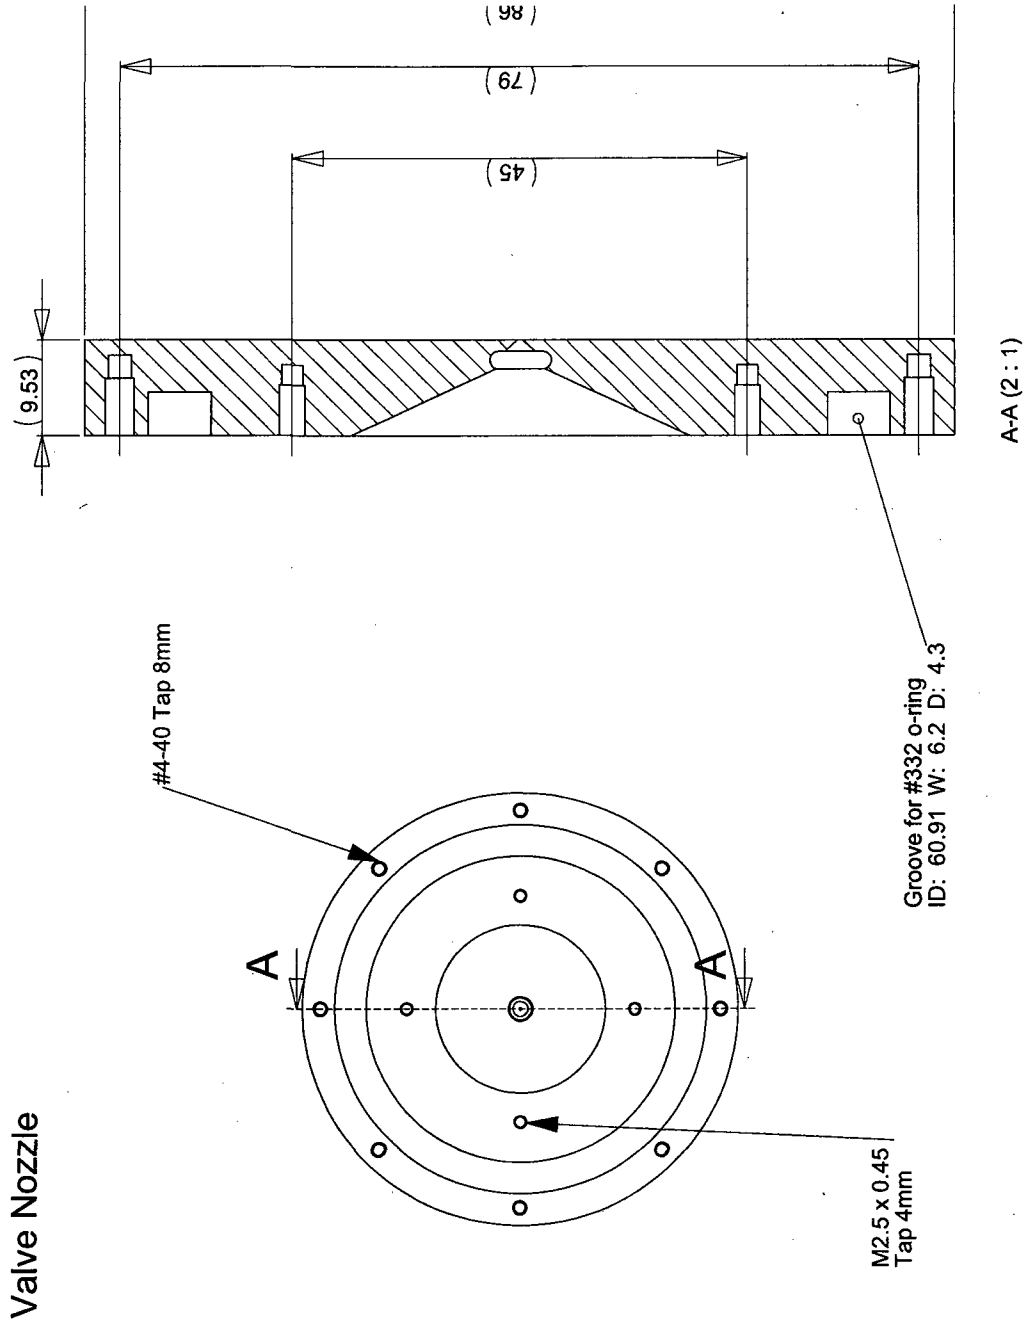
Piezo valve nozzle (bolts to front of valve body). Inner bolt ring supports the piezo holder.
